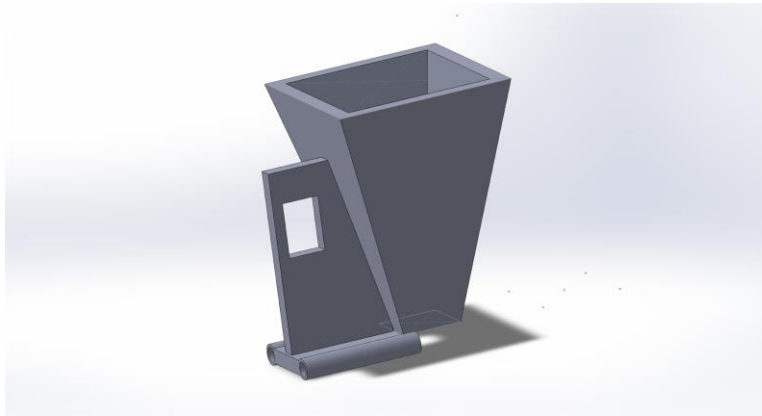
CAD assembly model of Dirt Dispenser V1.0.
